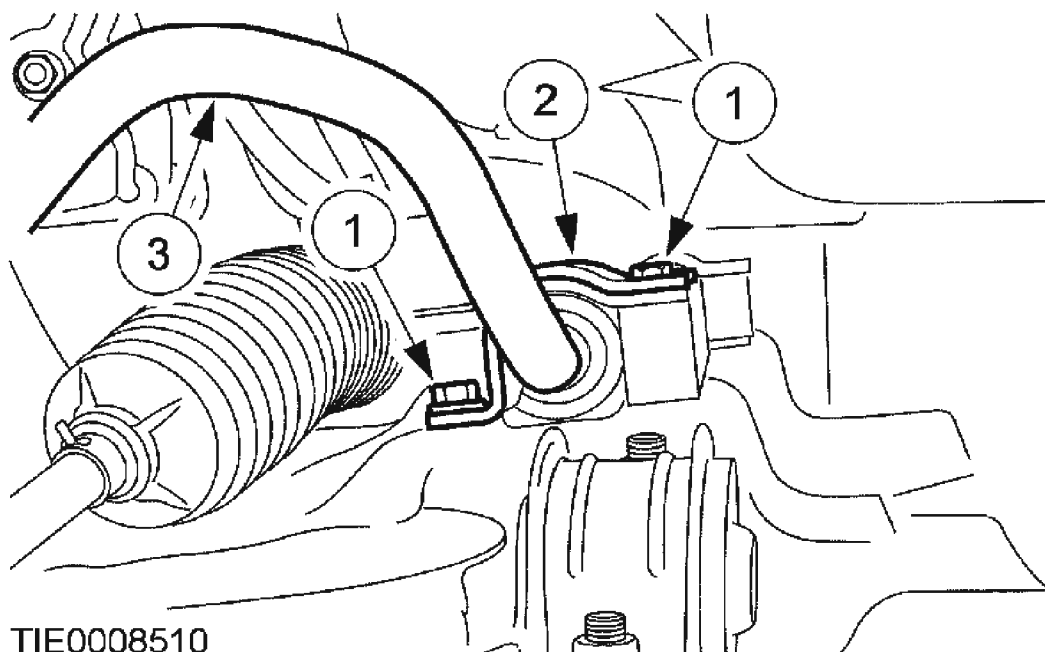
Removing Crossmember Bolts (Support Removed For Clarity)
